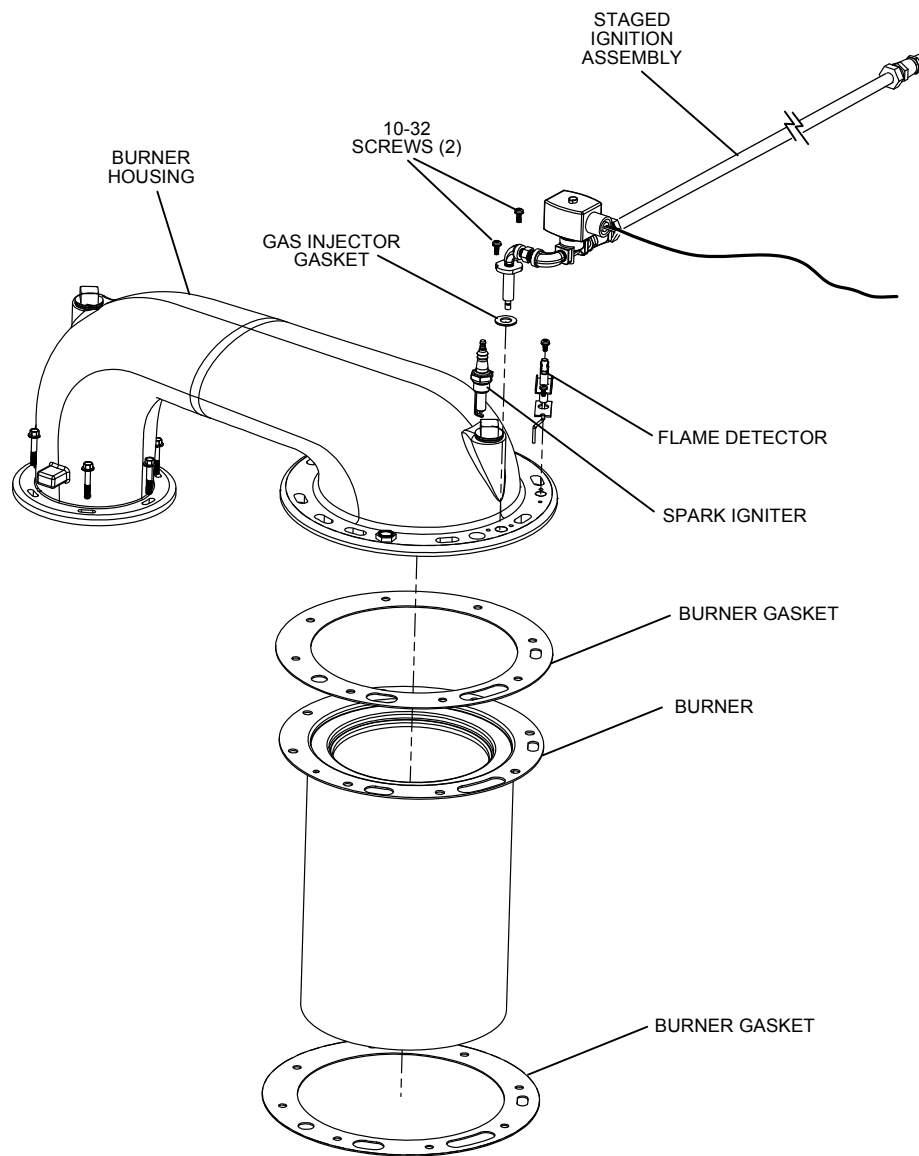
Benchmark 3.0LN Burner Assembly Removal
